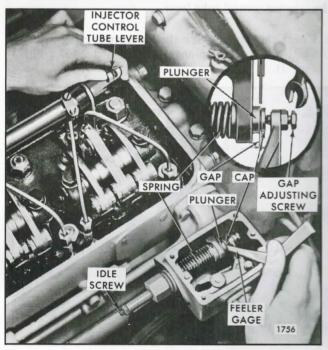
Adjusting Gap (Double-Weight Governor) using Tool J 3172
